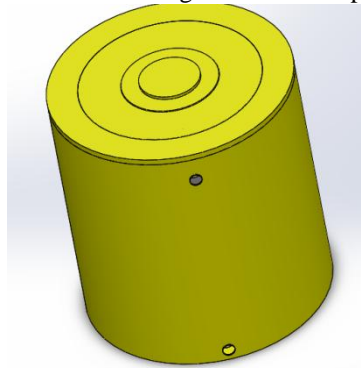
Retracted full drawings of the 50tons, 3-stage Telescopic Hydraulic Jack
